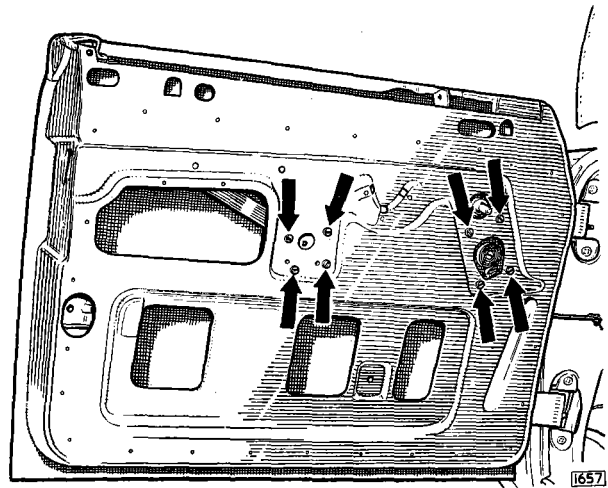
Showing the screws securing the window winding mechanism to the door frame.
